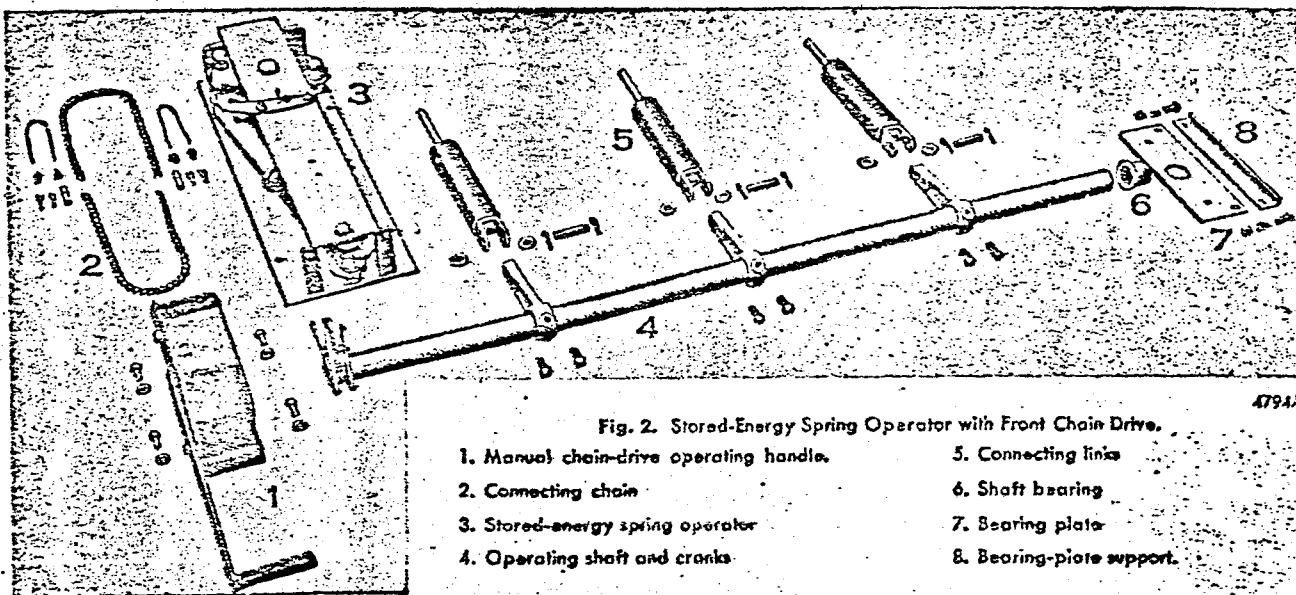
Stored-Energy Spring Operator with Front Chain Drive.
